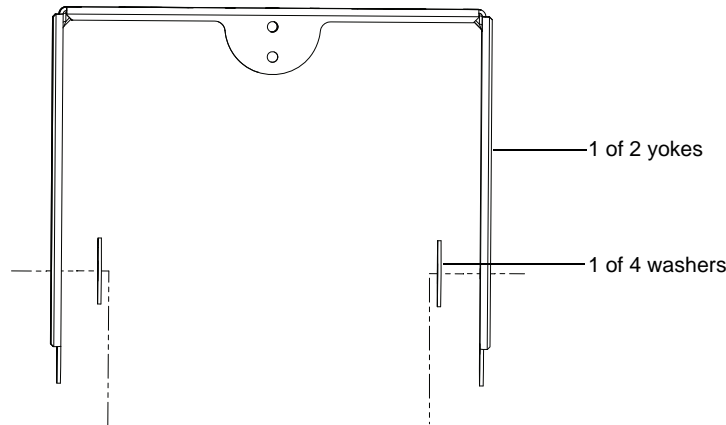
YK-1090 Rigging Kit Parts (Overhead View)
